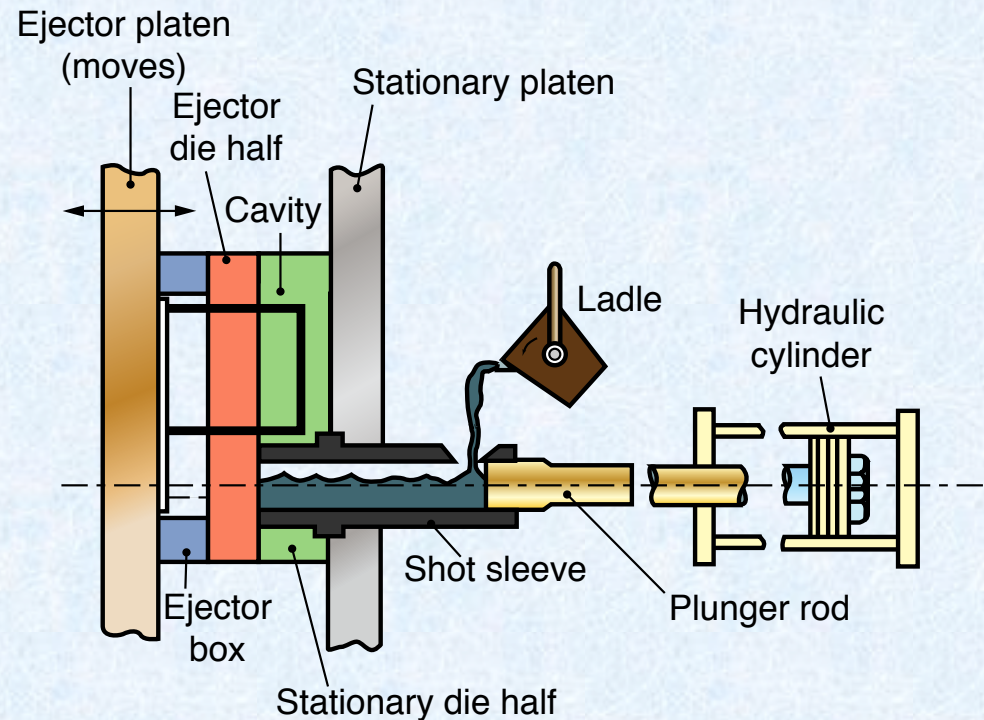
Schematic illustration of a die casting machine. *Source:* From Kalpakjian and Schmid [2010].
